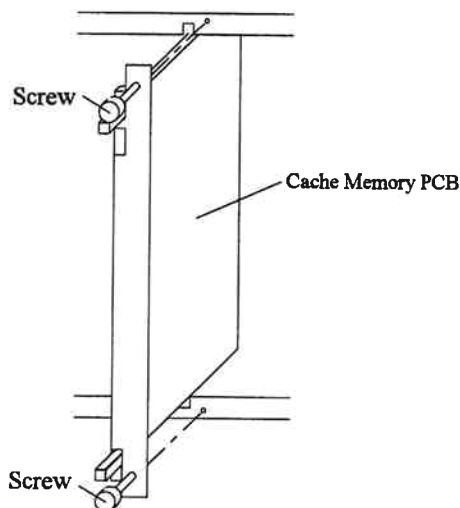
Removal of the Cache Memory PCB
